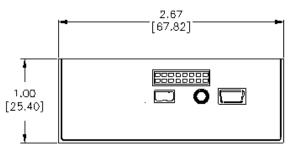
Mechanical drawing showing connector locations on the X-123SDD. All other mechanical dimensions are unchanged from the standard X-123.
